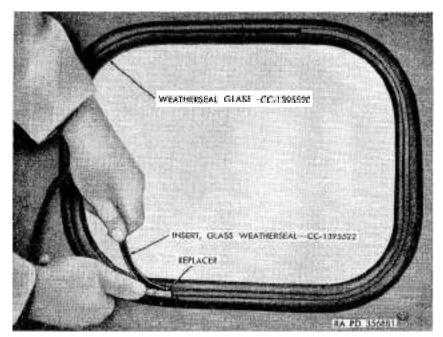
Installing glass wathersal insert with an improvised weatherseal insert replacer.
